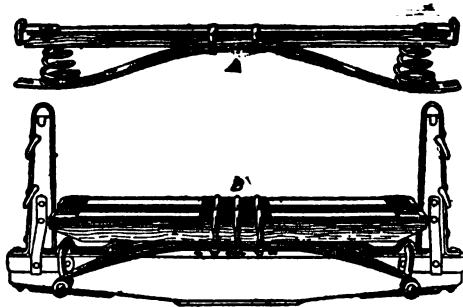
Two types of spring bolsters: *a* one-horse single; *b* two-horse double
